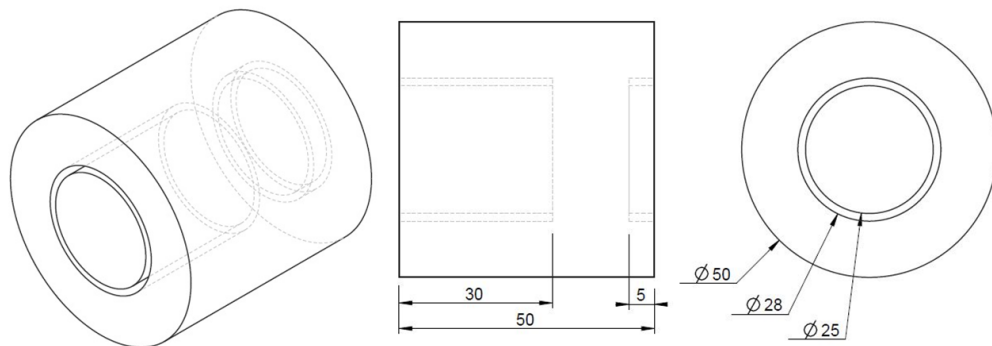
Specimen geometry and dimensions of the punch-through shear experiment
